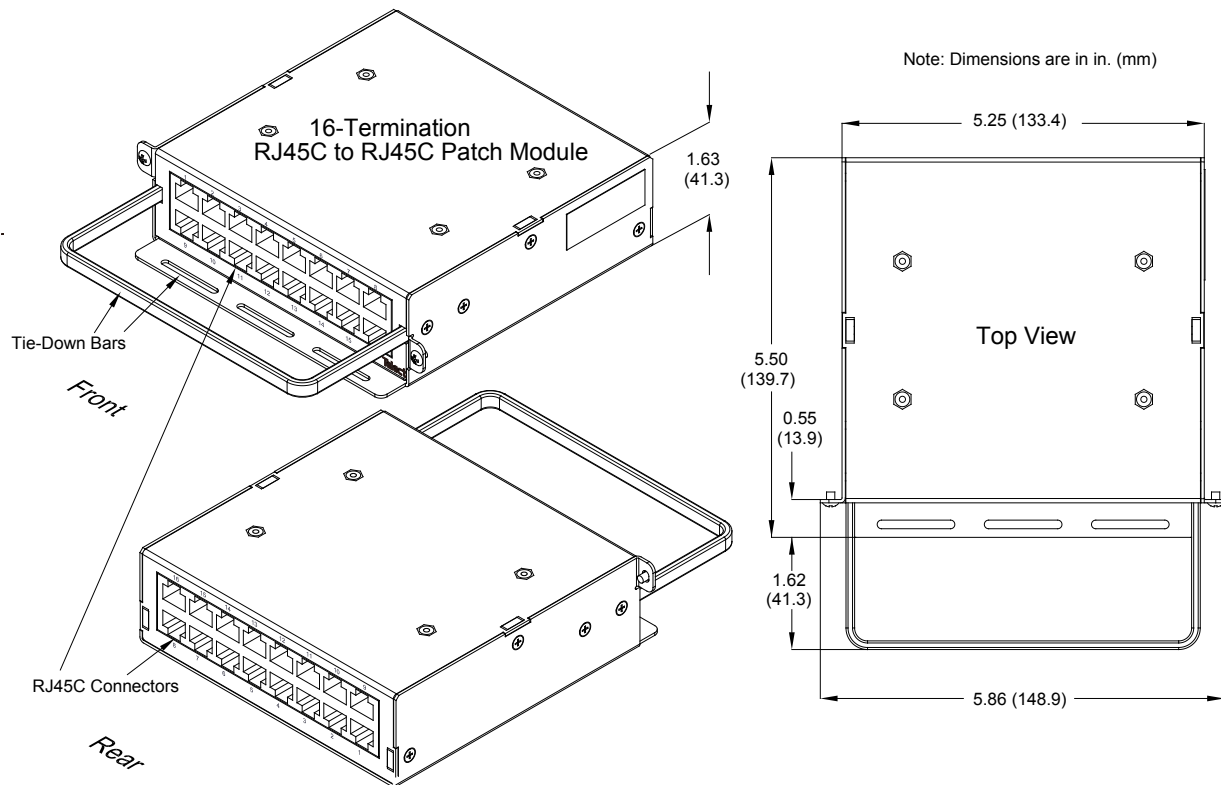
Model ELF-9716-1900 Parts & Dimensions
